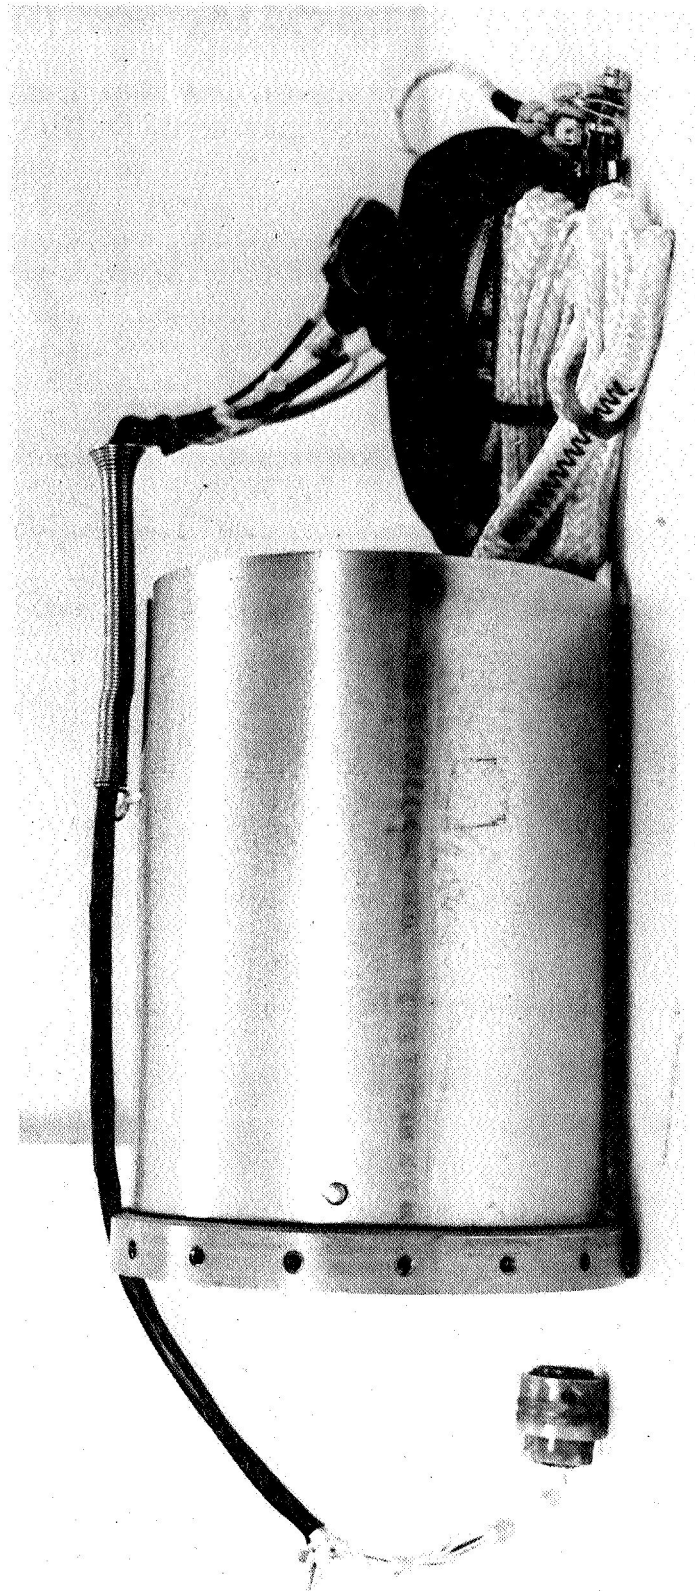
Cable Assembly Attached to Parachute Cylinder
